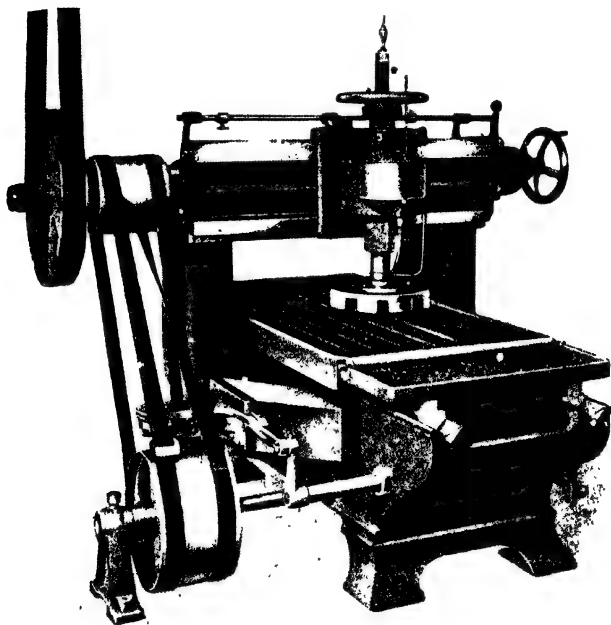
“Hansa” Automatic Stone-grinding Machine.
